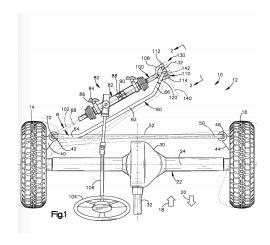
RACK AND PINION STEERING SYSTEM FOR A FOUR-WHEEL DRIVE CAR
